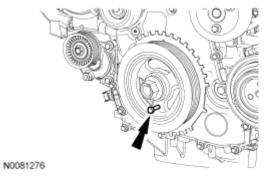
Identifying 6 mm x 18 mm Bolt Courtesy of FORD MOTOR CO.
